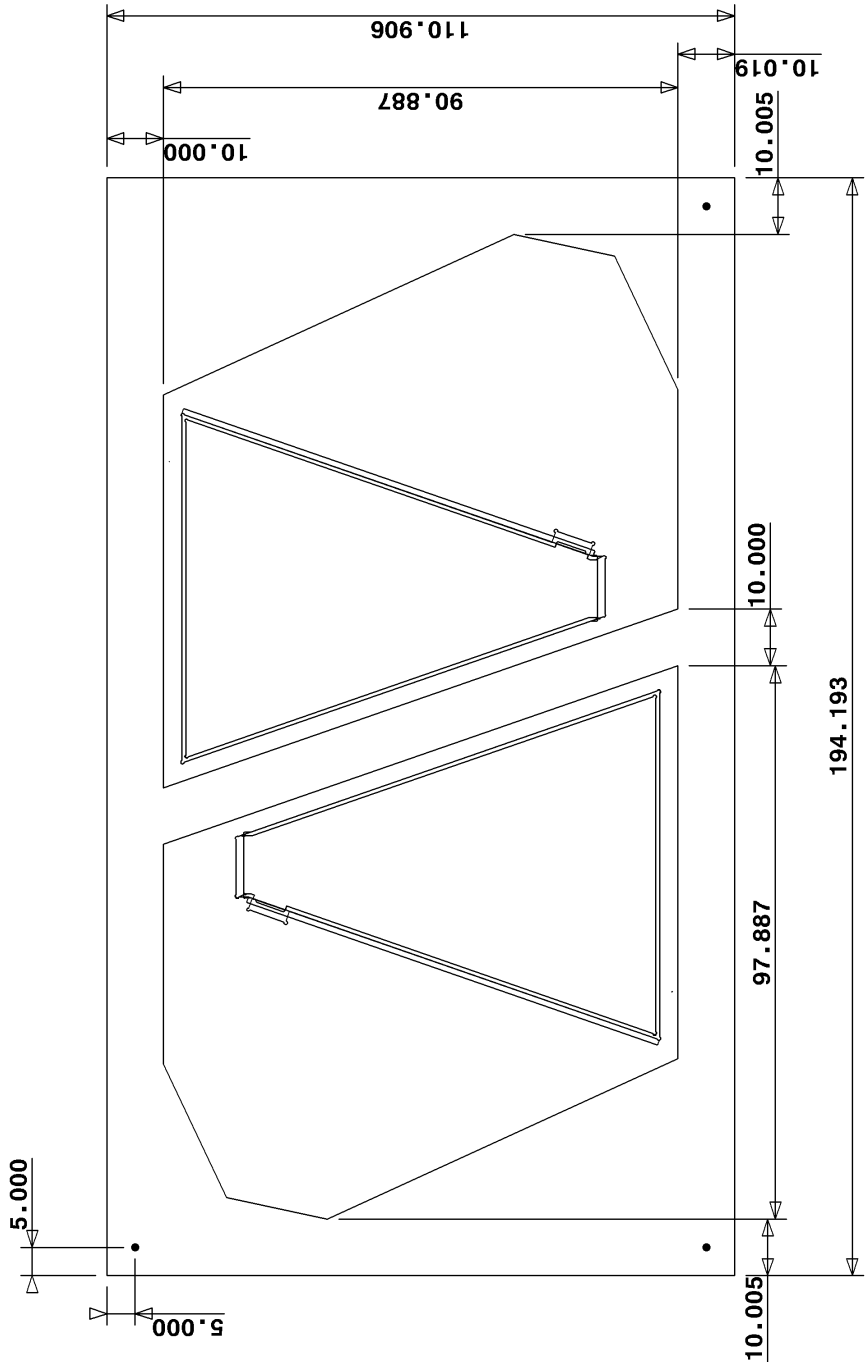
Dimension and layout of the panel hosting two Hybrid PCBs. The reason to manufacture the PCB as a panel is due to the need during component assembly to have a rectangular outline for automated placement and soldering. All dimensions are given in mm.
